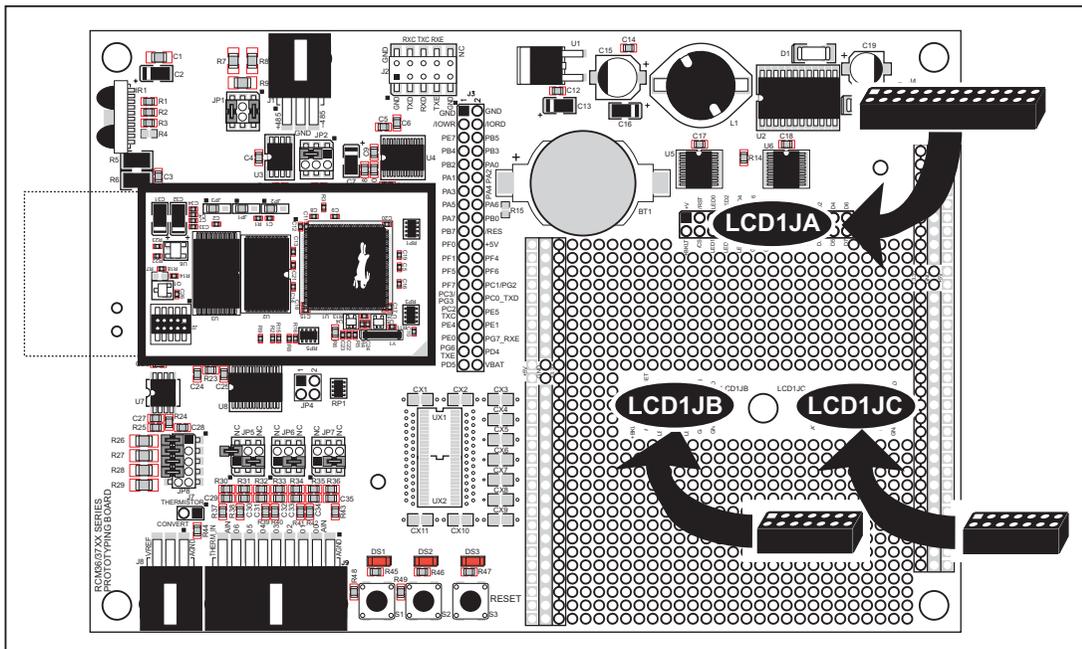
Solder Connectors to RCM3600 Prototyping Board
